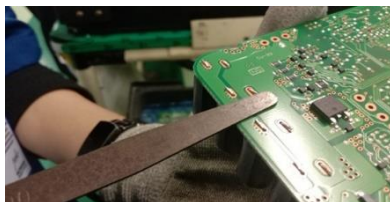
Checking Bending Result Using a 1mm Feeler Gauge
